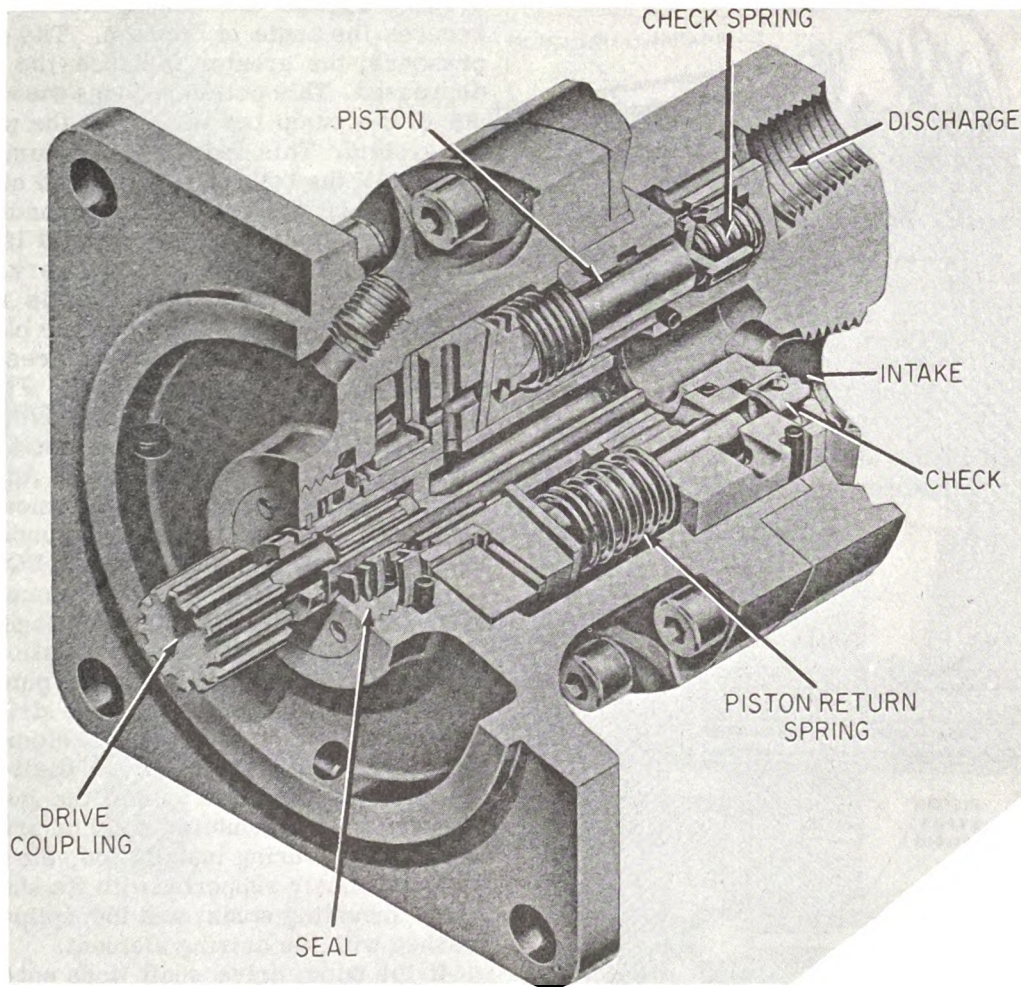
Cutaway view of Stratopower hydraulic pump.
